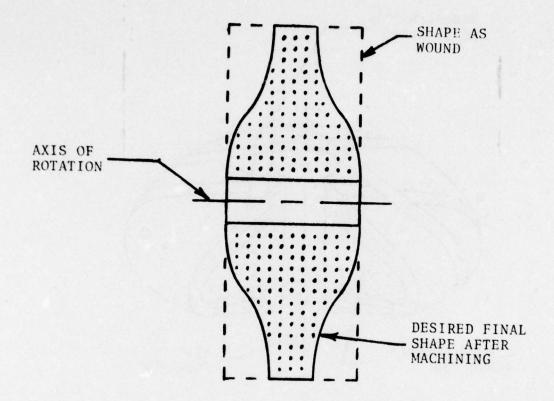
MACHINED CROSS-SECTION SHAPE OF CIRCUMFERENTIAL-WOUND FLYWHEEL.
